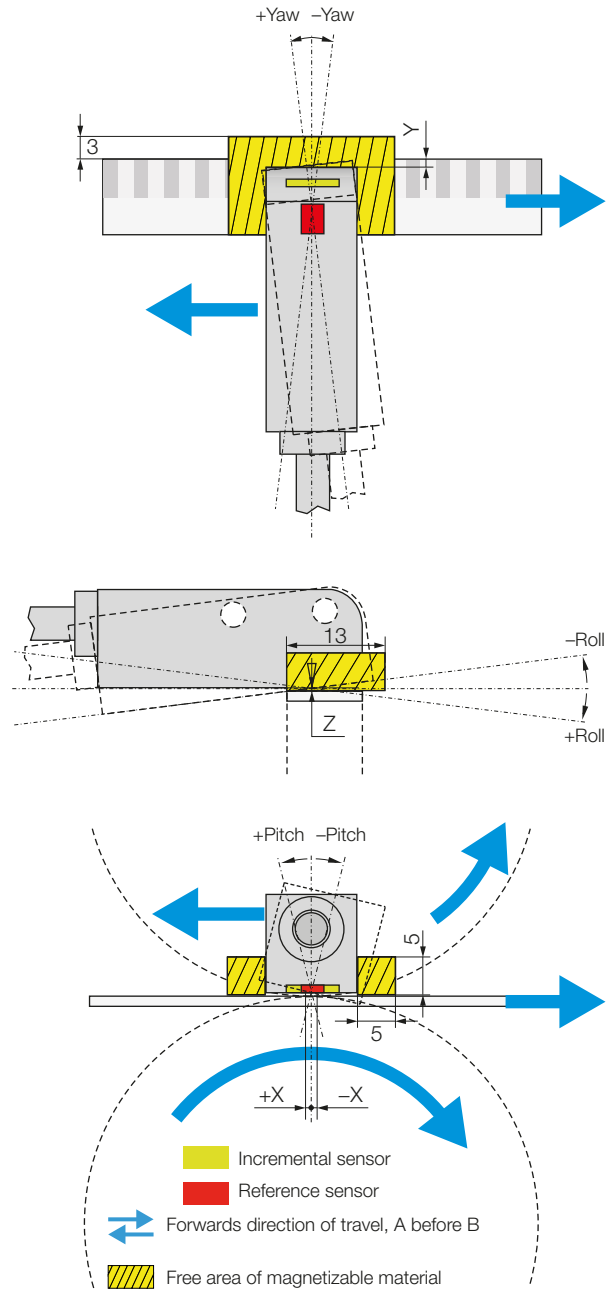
Distances and tolerances BML-S1F2...
